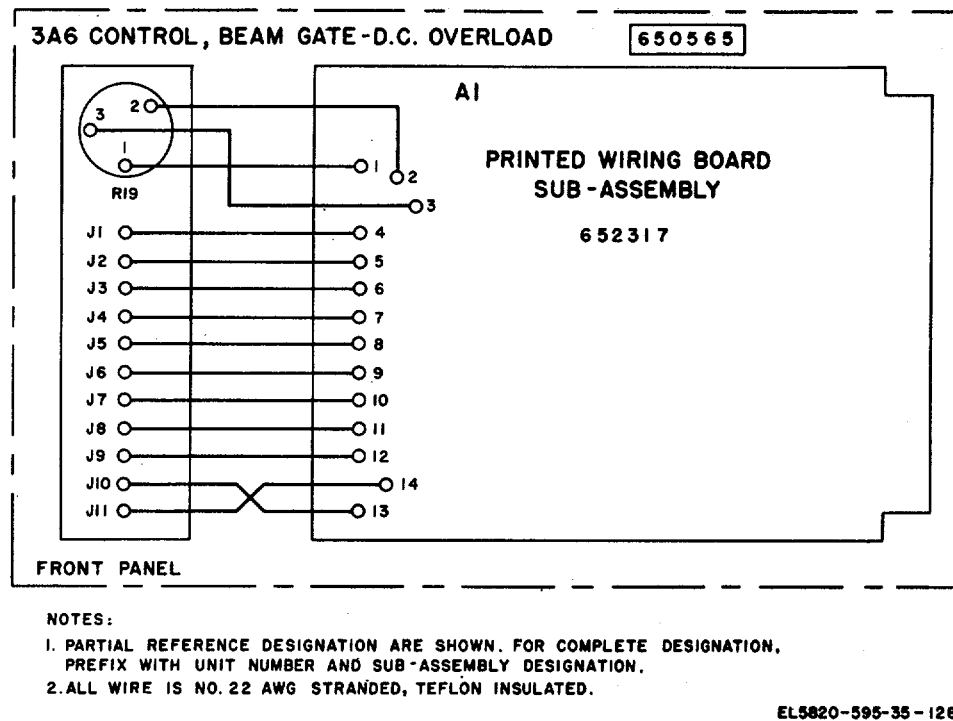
Beam gate-dc overload control 3A6 assembly, wiring diagram.
